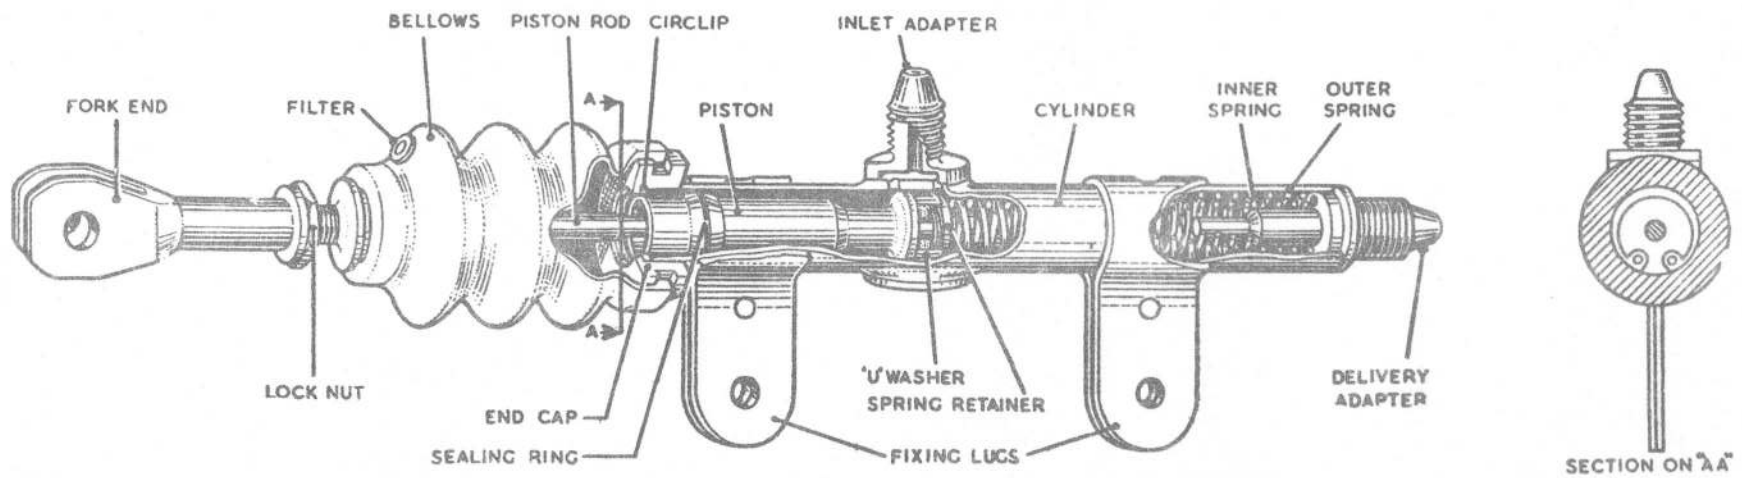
Sectional arrangement of master cylinder, part No. ACM.15354
